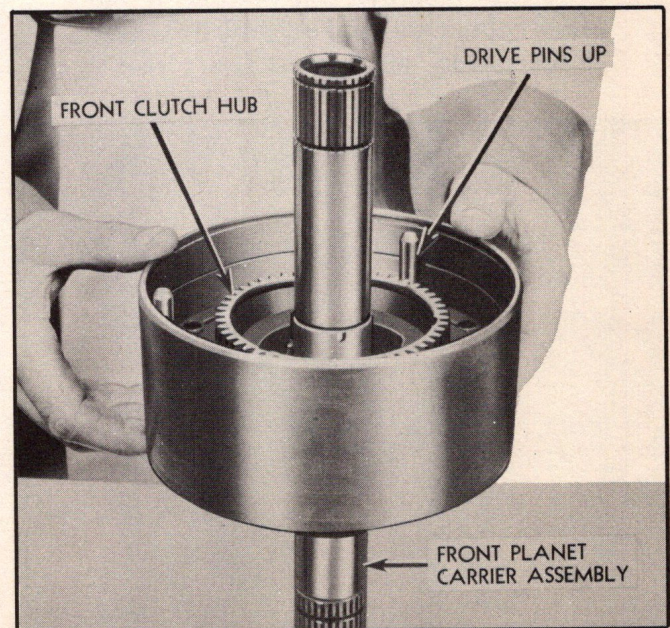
Assembling Front Unit Drum to Planet Carrier
